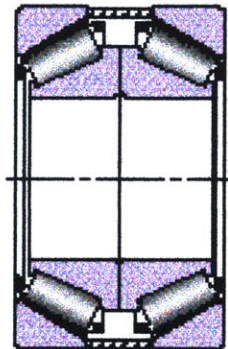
Direct mounting of two-row tapered roller bearing. Source: The Timken Co.
